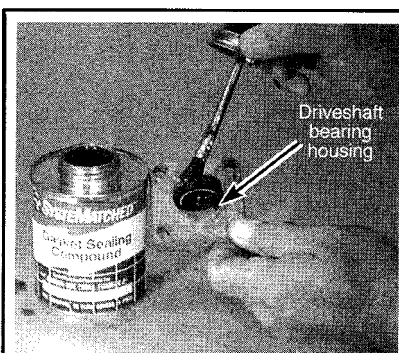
For dual back-to-back seals with metal casings, apply a light coating of sealant to the seal cases or their mating surface in the bearing housing
